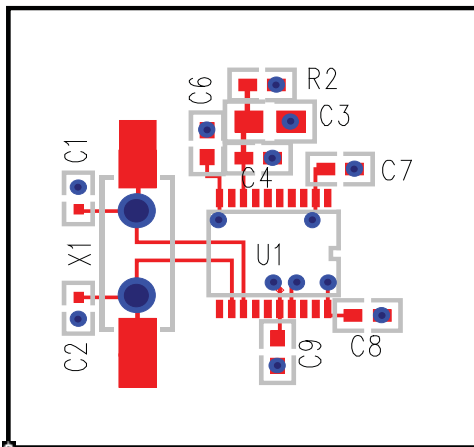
B. 843002-01 PC BOARD LAYOUT EXAMPLE
